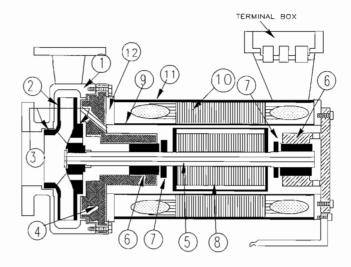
Canned Motor Pump. 1) Casing, 2) impeller, 3) wear ring, 4) back cover, 5) internal shaft, 6) radial sleeve bearing, 7) thrust bearing, 8) inner rotor, 9) inner can, 10) stator windings, 11) outer can, and 12) transition flange.
